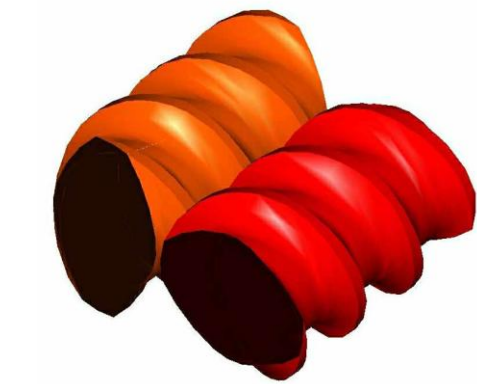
Geometry of the intermeshing screw in co-rotating extruder
